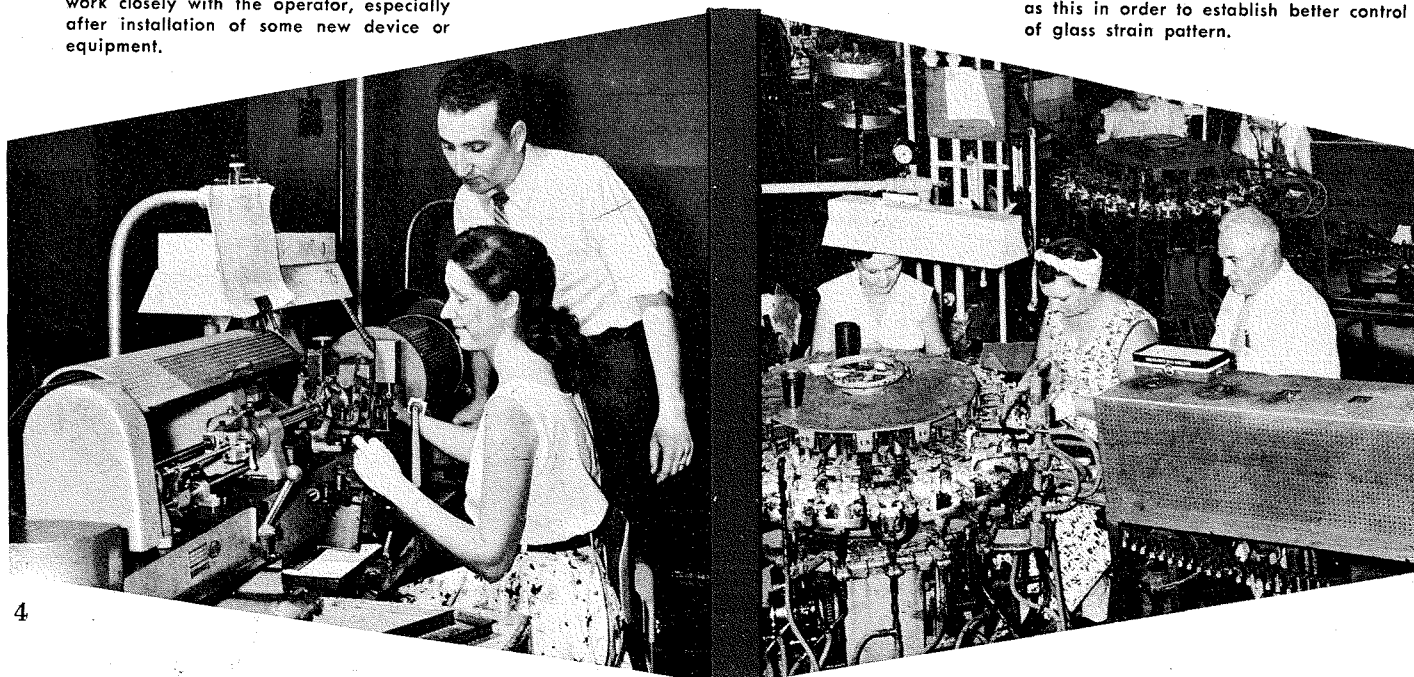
Glass Engineer Marshall Holland is checking the operation of a 24-head GT stem machine. The Glass Engineer spends much of his time observing machines such as this in order to establish better control of glass strain pattern.
